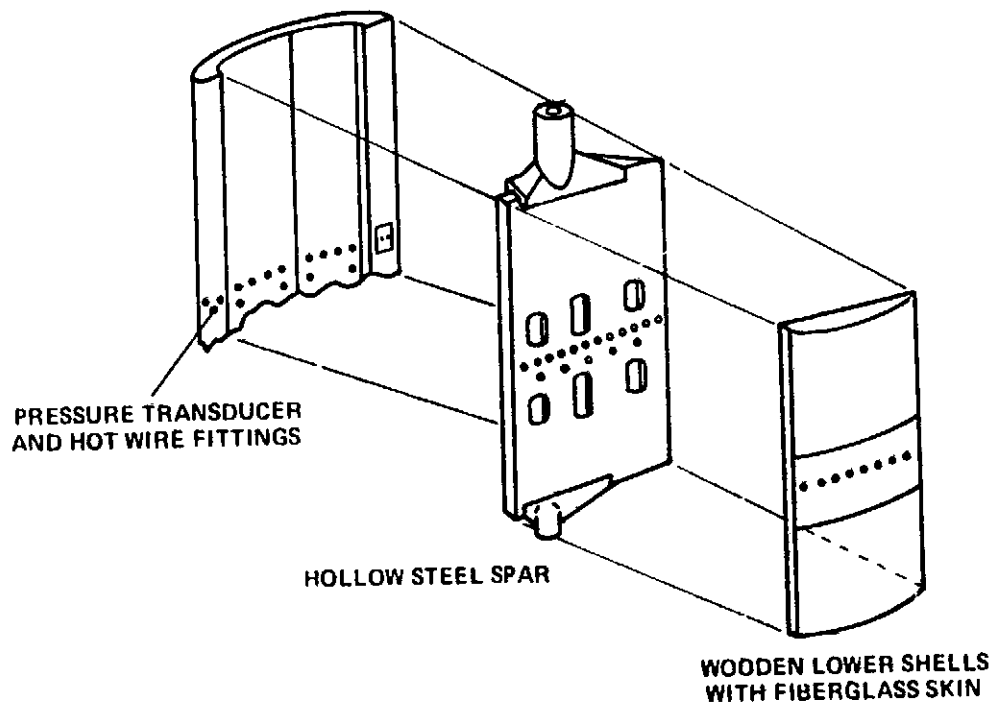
Sketch of the wooden model shells surrounding the steel spar.
